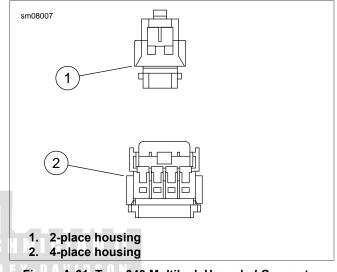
Tyco 040 Multilock Unsealed Connector (socket housings shown)
